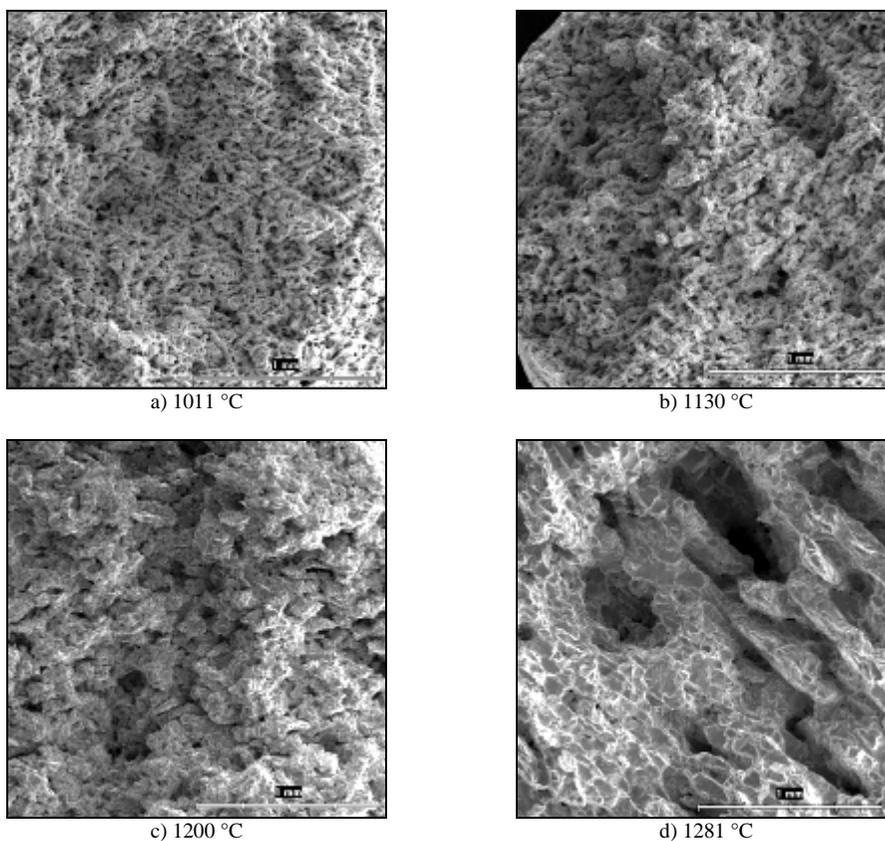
Fracture surfaces in case of selected tensile tested samples – SEM
